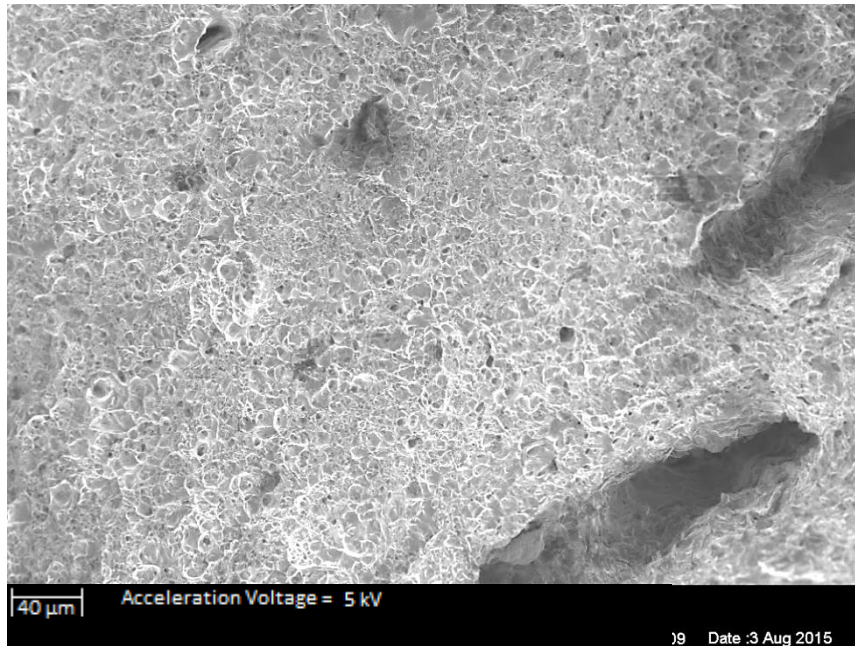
SEM image of the tensile fracture surface of sample 1. The surface displays a dimpled surface finish which is characteristic of ductile fractures (Heat treated for 579h at 635°C prior to welding and a 672h PWHT at 635°C).
